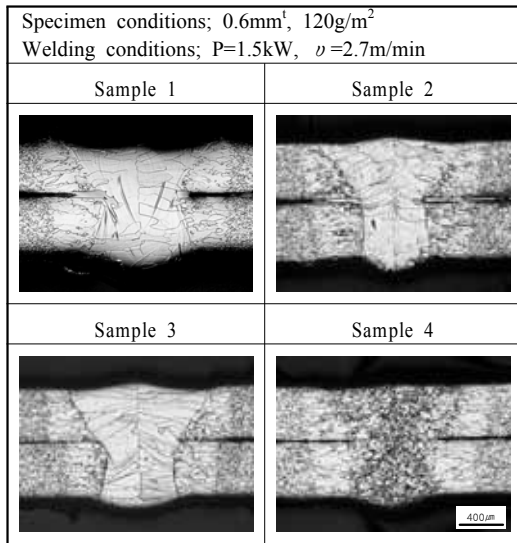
Weld cross-section of surface pre-treated specimens
